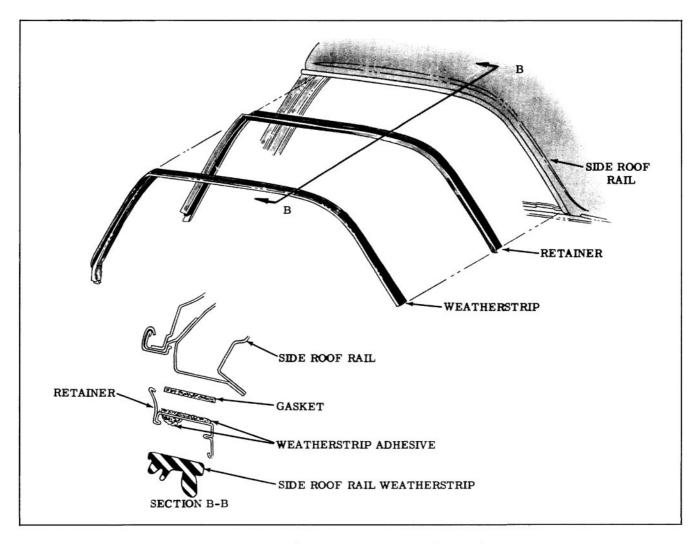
Side Roof Rail Weatherstrip (47 Style)
